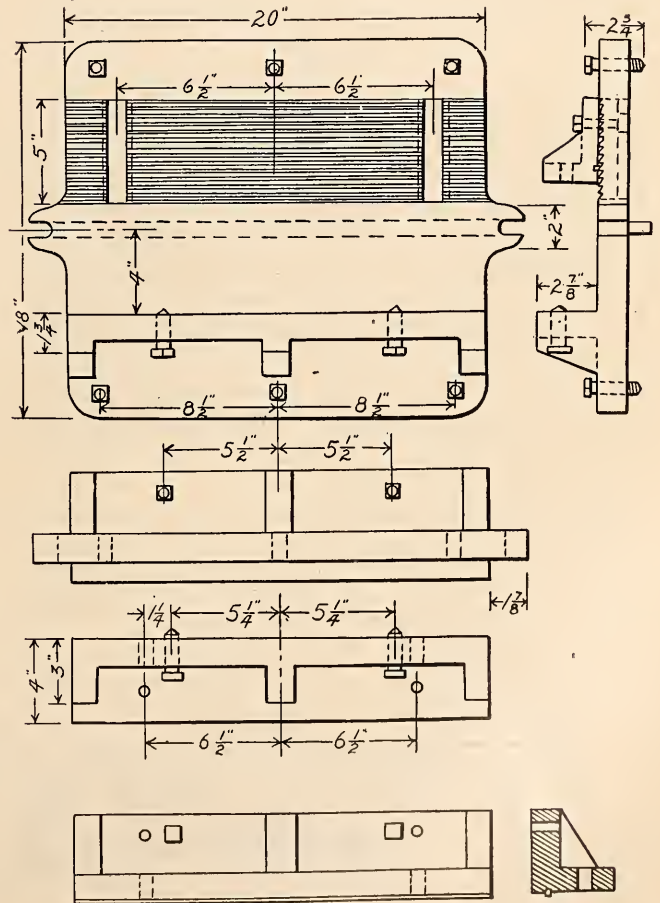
PLANER CHUCK FOR SHOES AND WEDGES.
